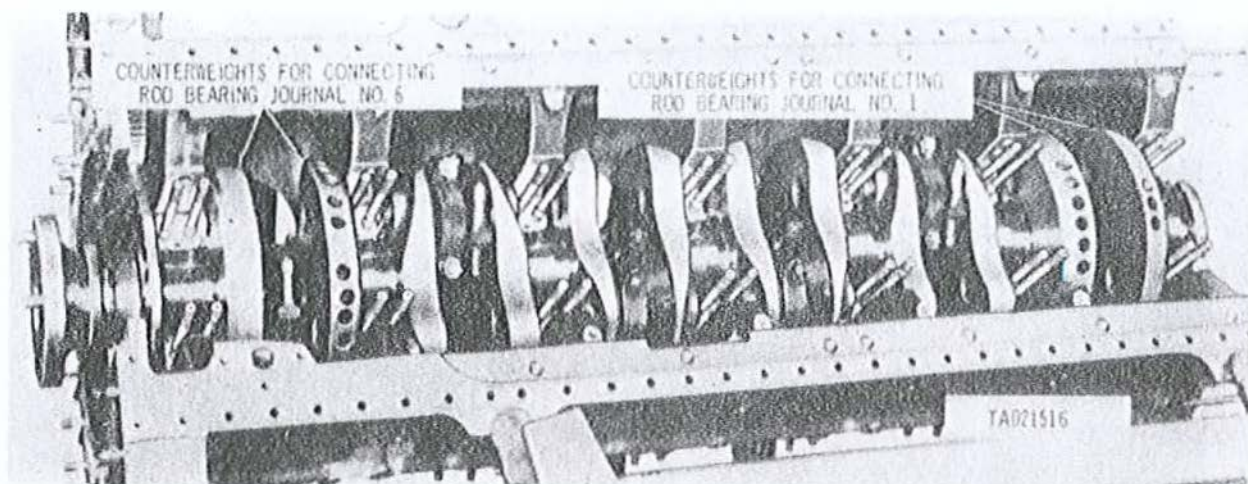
Crankshaft with main bearing caps removed showing correct position of crankshaft counterweights before removal or after installation of crankshaft.
